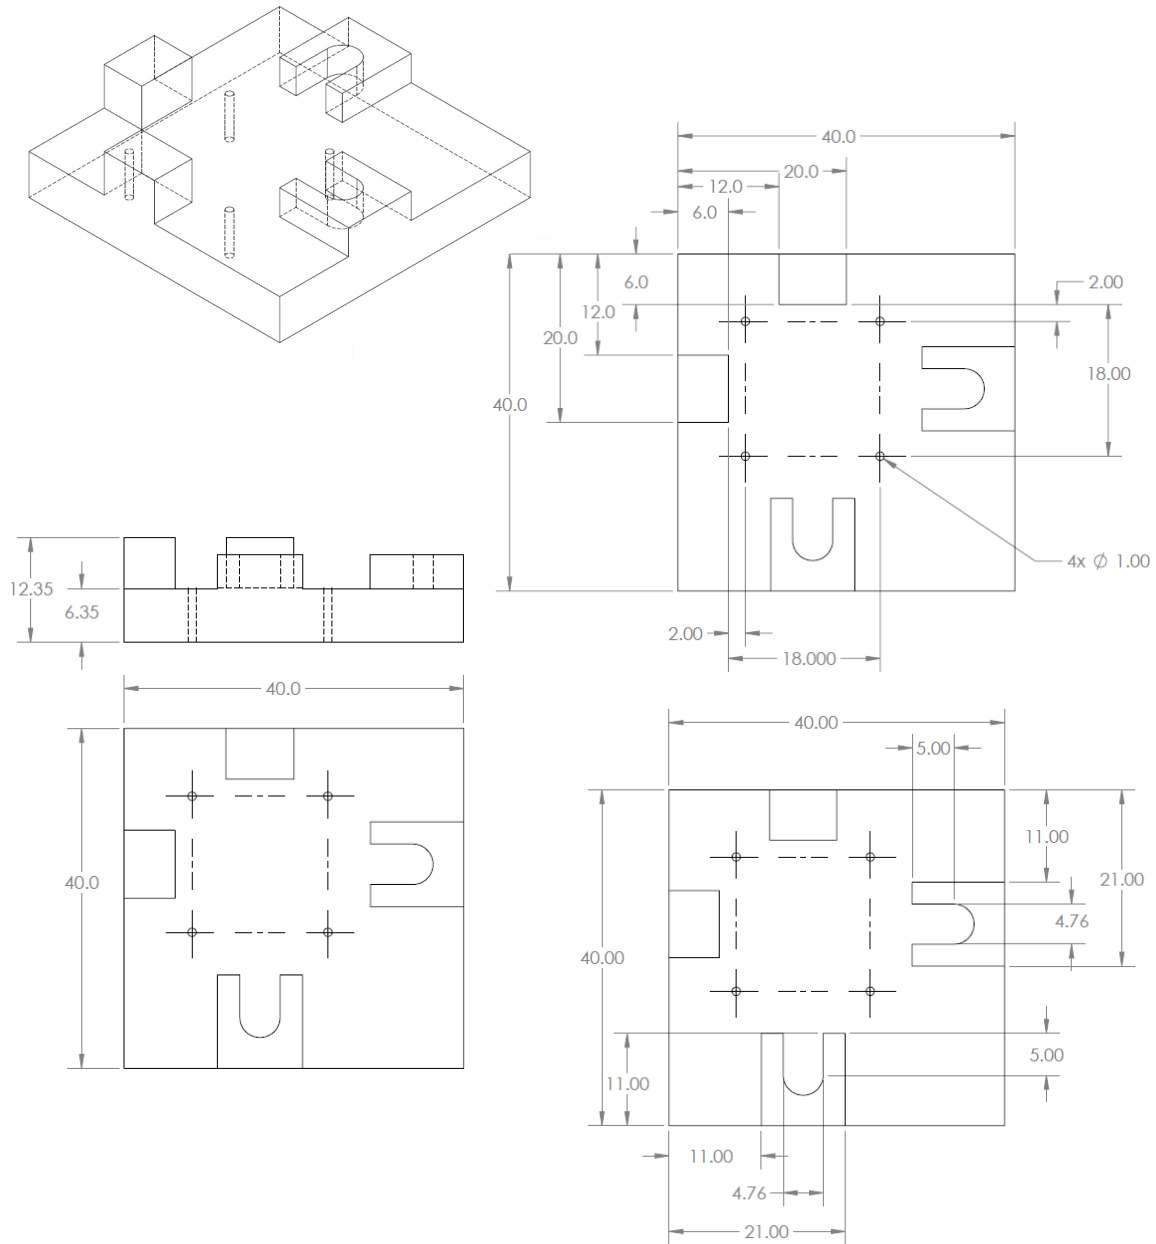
Technical drawings of the manifold assembly fixture; all dimensions in millimeters unless otherwise specified.
